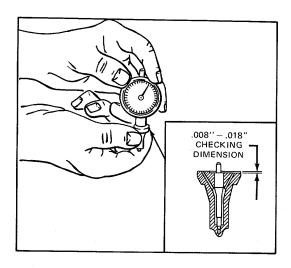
Checking Needle Valve Lift with Tool J 9462-02
